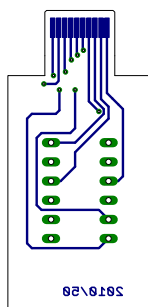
inTouch LED Matrix Board Bottom Layout
